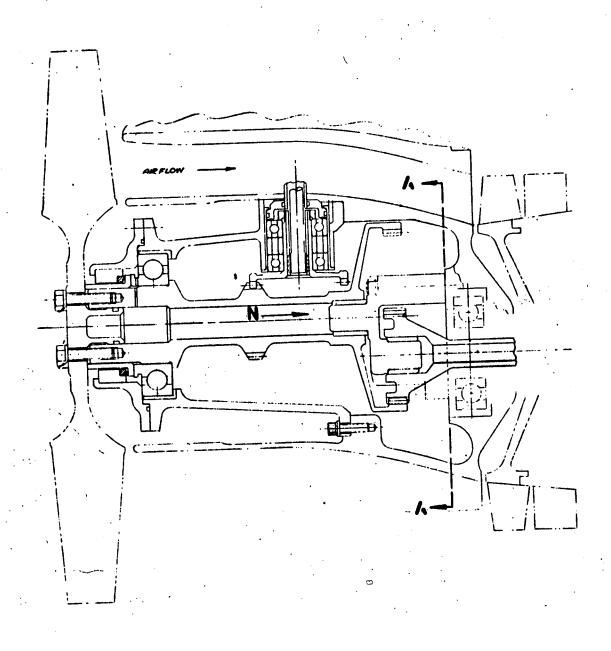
Alternate version of Figure 27 showing internal/external arrangement—spur gears.
